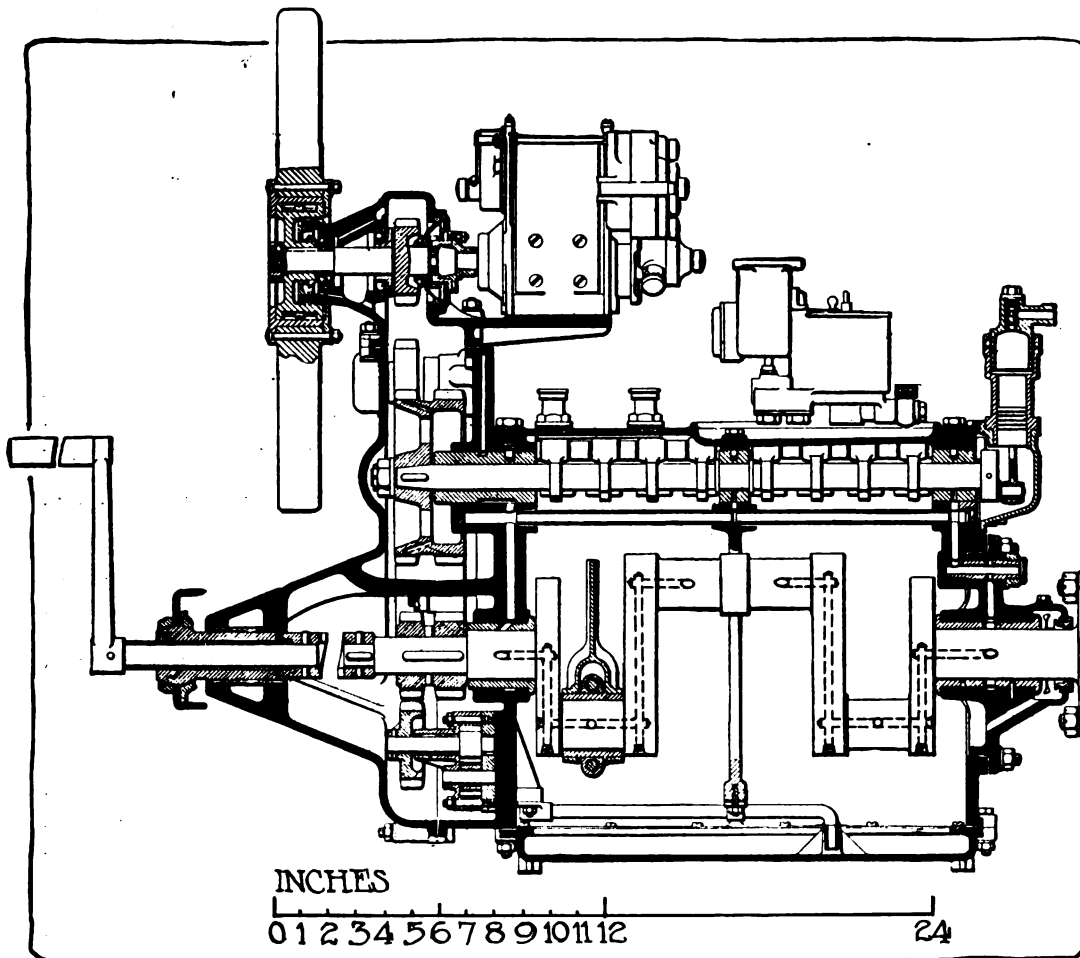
Longitudinal section through motor with cylinders removed illustrating motor details
